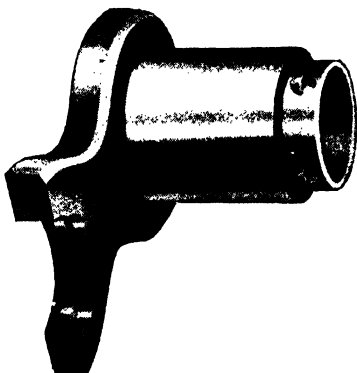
Keyed bush and plate, one end of plate cut away to show projections in the bore formed by the keys. These projections show the moulding of the metal by the keys.
